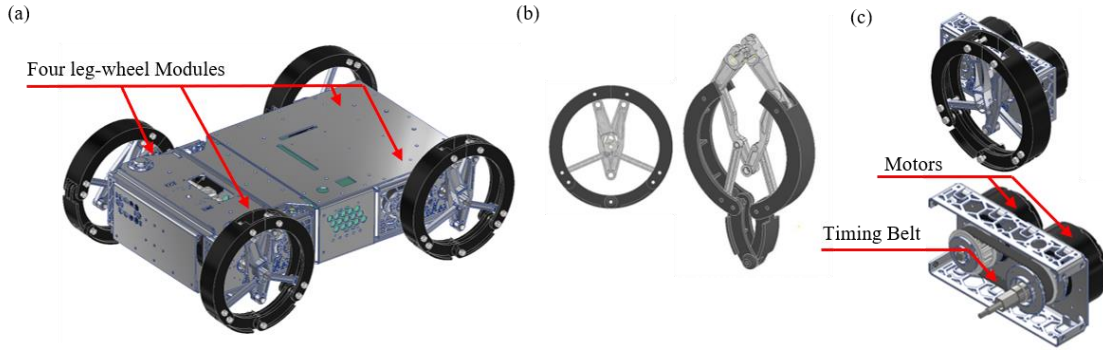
(a) CAD drawing of the leg-wheel transformable robot; (b) CAD illustration of the leg-wheel mechanism; (c) CAD illustration of the 2-DOF driving module which provides 2-DOF coaxial and rotational output
